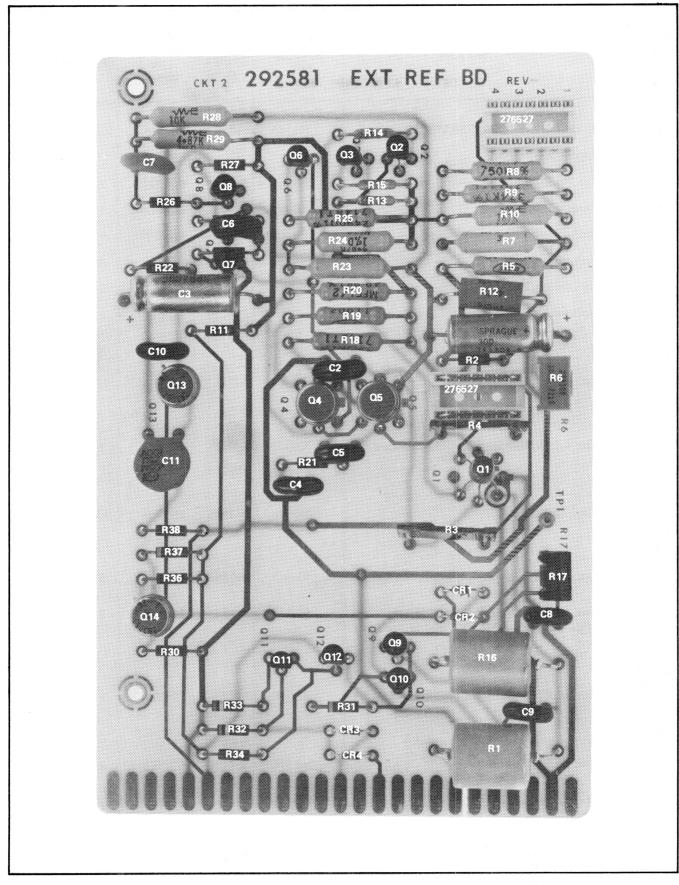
EXTERNAL REFERENCE PCB ASSEMBLY (-03 OPTION)
